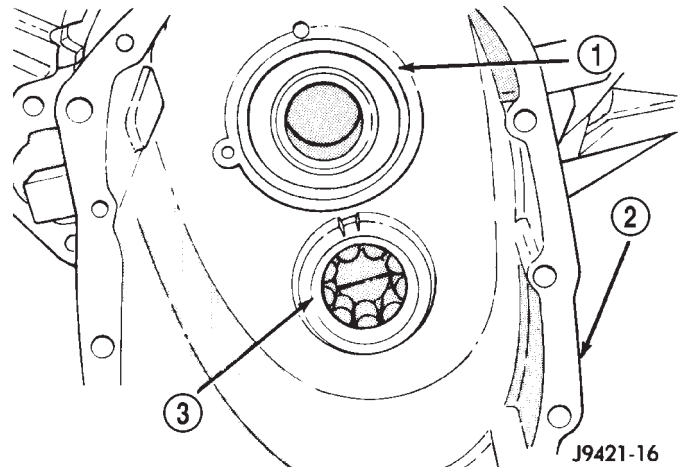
Input Shaft Bearing and Countershaft Front Bearing Race Location
